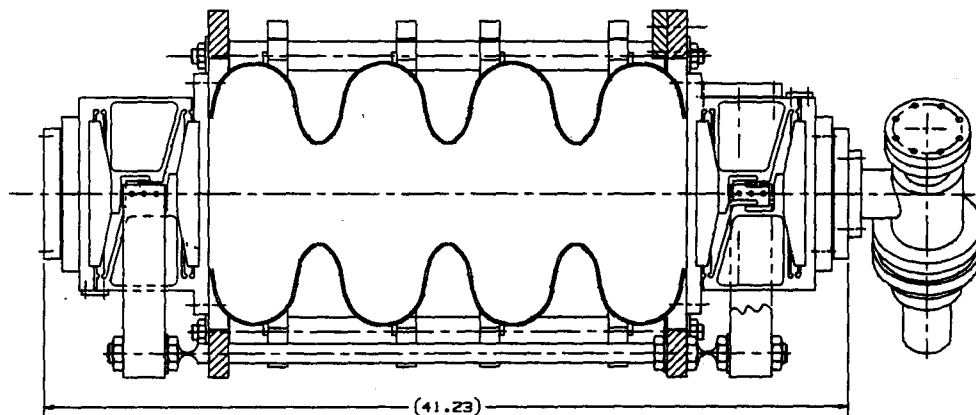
Engineering drawing of a 4-cell 805 MHz cavity, showing the stiffening scheme and tuner.
